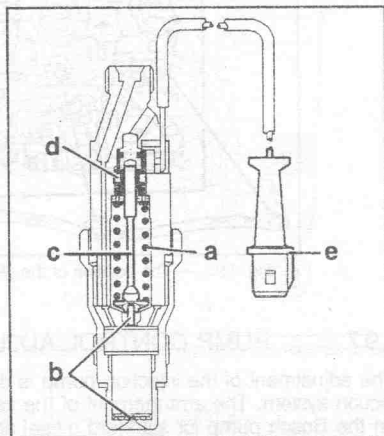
Sectional view of the No. 3 injector holder fitted to the DK5 engine. The No. 4 injector holder of the XUX11 BTE engine is similar.
